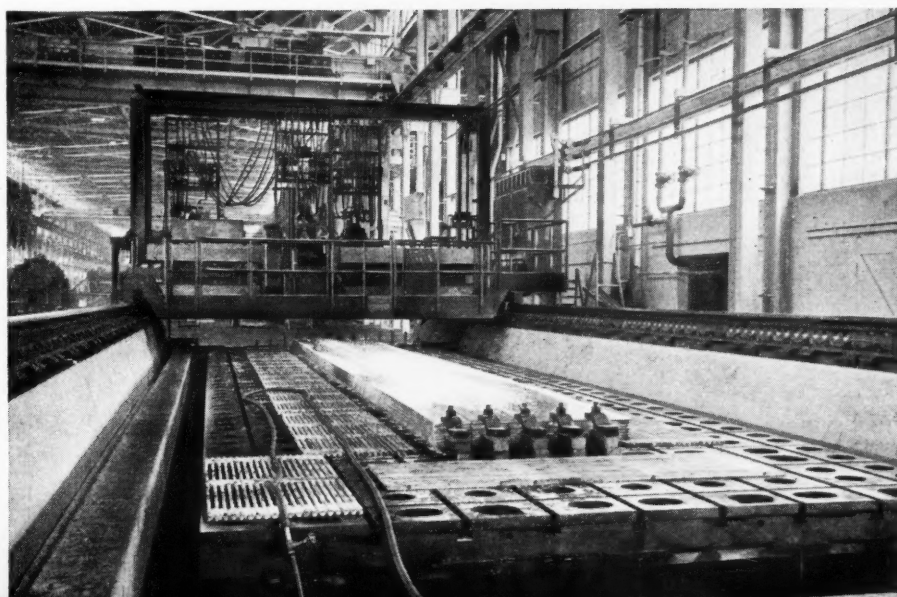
Aluminum sheets or plates stacked to a thickness of 6 inches and up to 50 feet in length are multiple-sawed by this large machine, which is built with a stationary bed and a traveling rail on which the saws are mounted
